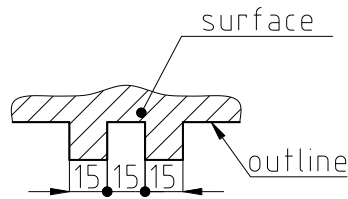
Dimensioning representation using the dimension styles for dimension lines and leaders
